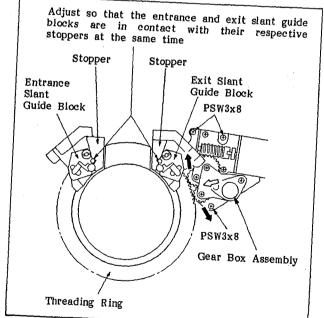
Adjusting the Position of the Gear Box Assembly
